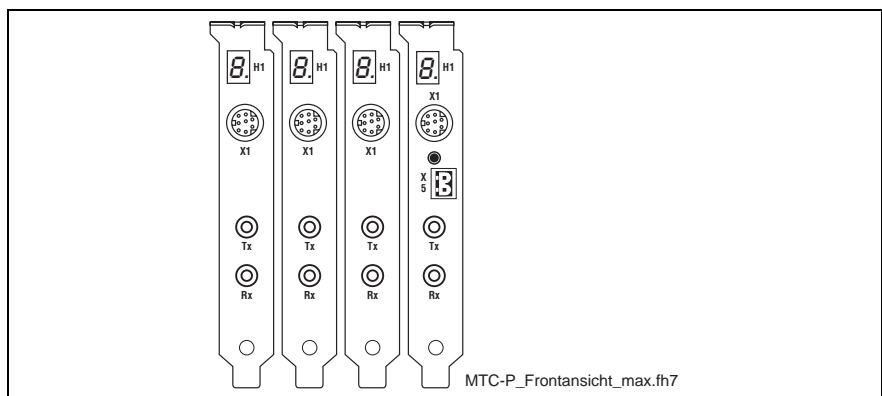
Dimensions of MTC-P01.2 with axis processor modules: Front view
